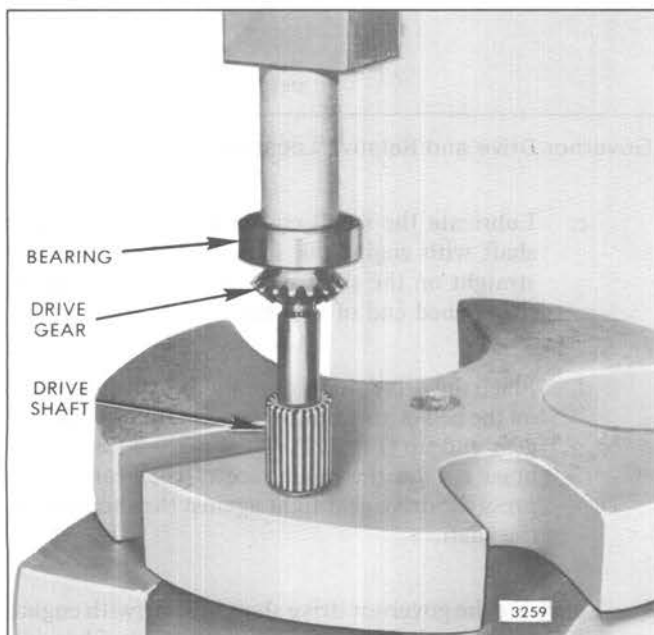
Installing Drive Gear and Bearing on Drive Shaft
